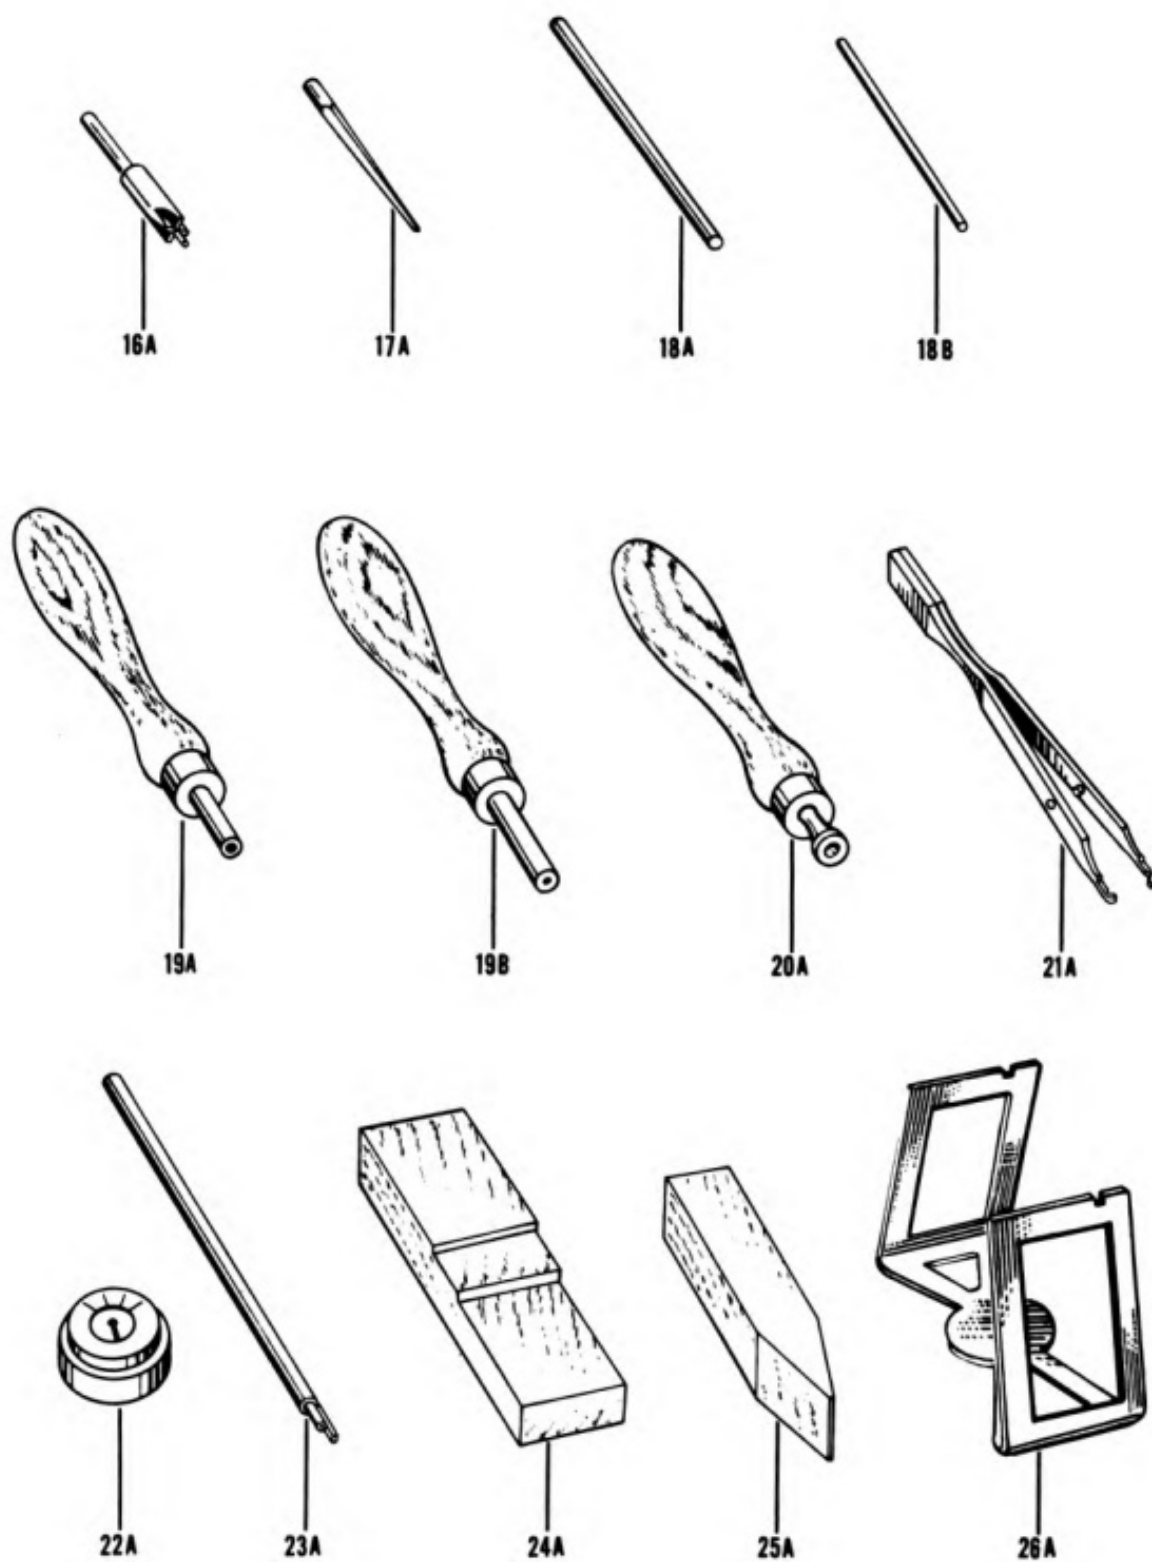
U.S. Navy Clock Special Tools and Fixtures
